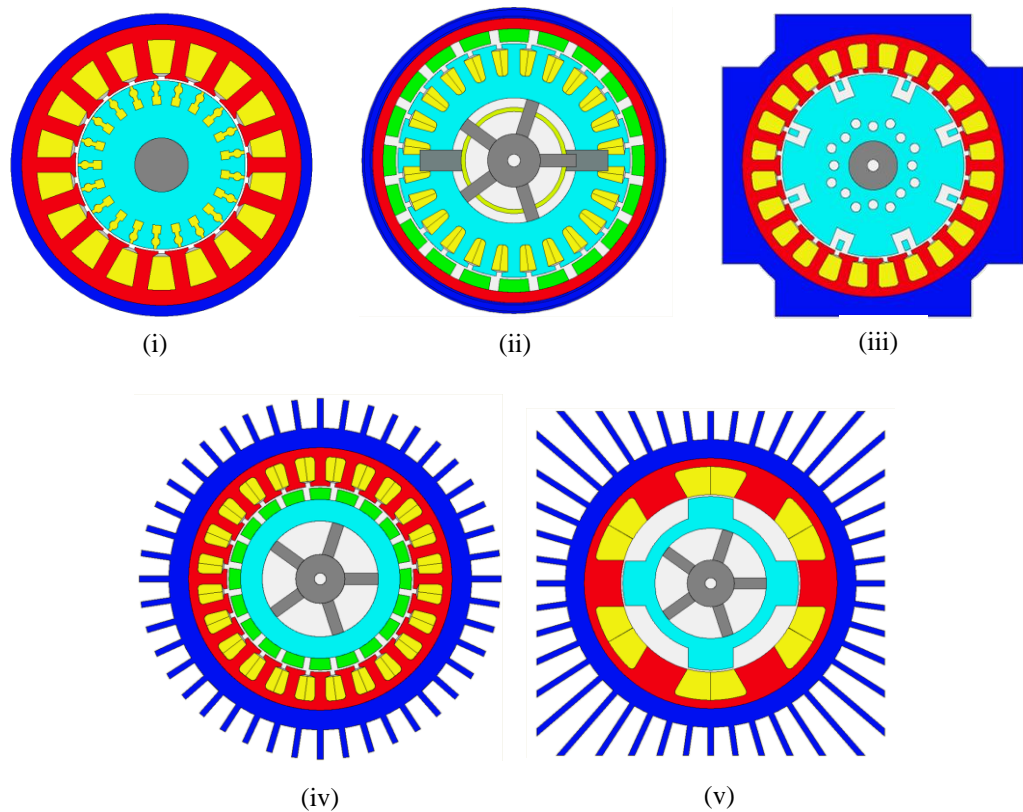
Sample of Possible Motor Geometries and Housing Designs
